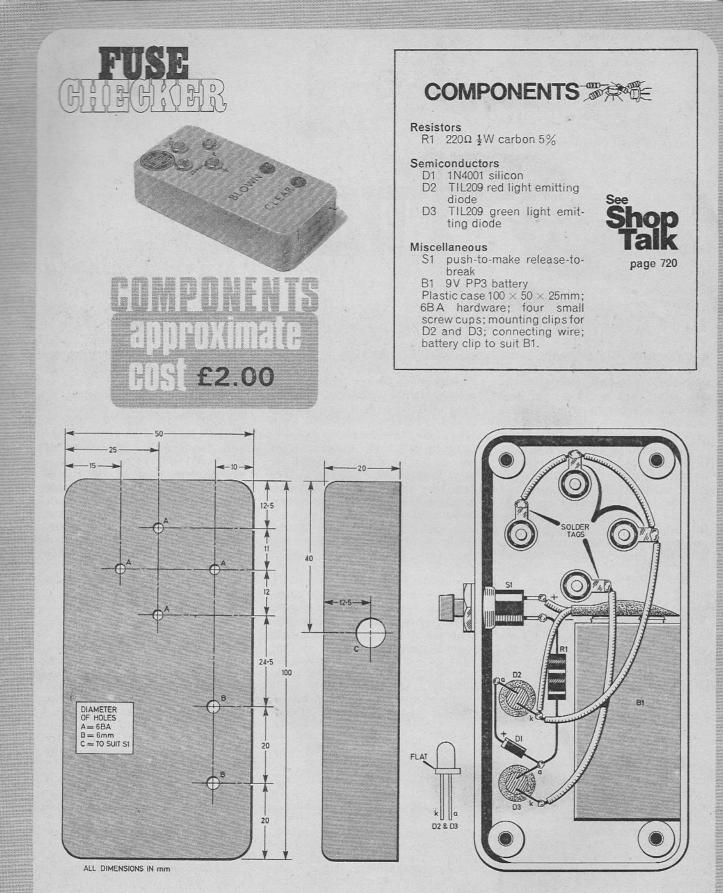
Case drilling details. It is important that the distances between the four holes "A" are exact. Otherwise the fuses will not bridge them properly and may cause incorrect reading. Fig. 5. Complete wiring details for the unit. Remember to solder the solder tags on to the wires before fitting them finally in place, otherwise the plastic case will melt from the heat of the iron. because its cathode is taken through the fuse to 0V. As it is glowing, about 2V appears across it Fig. 3. But for D2 to glow, 2V must appear across it and a further 0.6V across D1, that is point A, Fig. 1 must be at 2.6Vwith respect to 0V.
